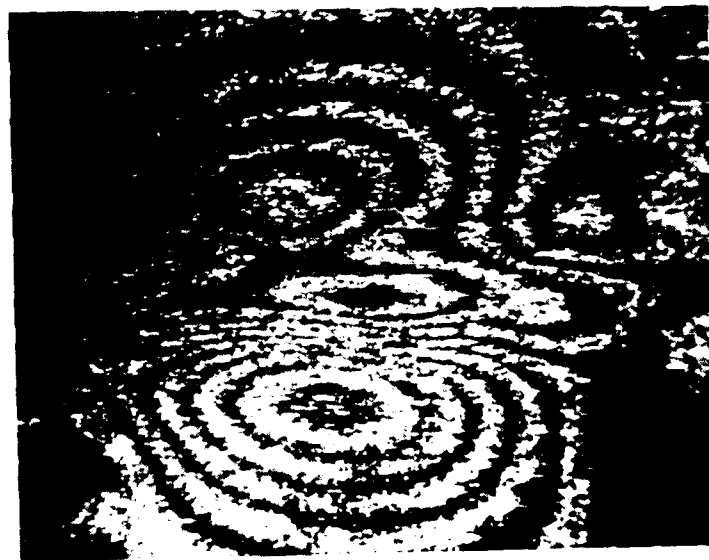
Y-VECTOR SHEAROGRAPH PRIOR TO WHERE A 10-INCH MID-BAY CRACK WOULD BE CUT INTO TEST PANEL NO. 1.
